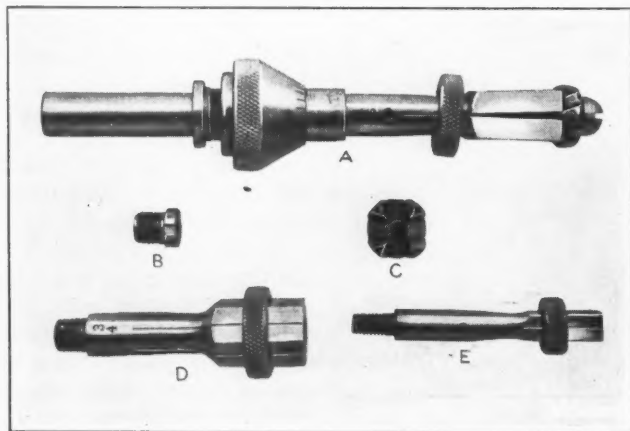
Adjustable Broach made by the Edward Hollander Tool Co.
